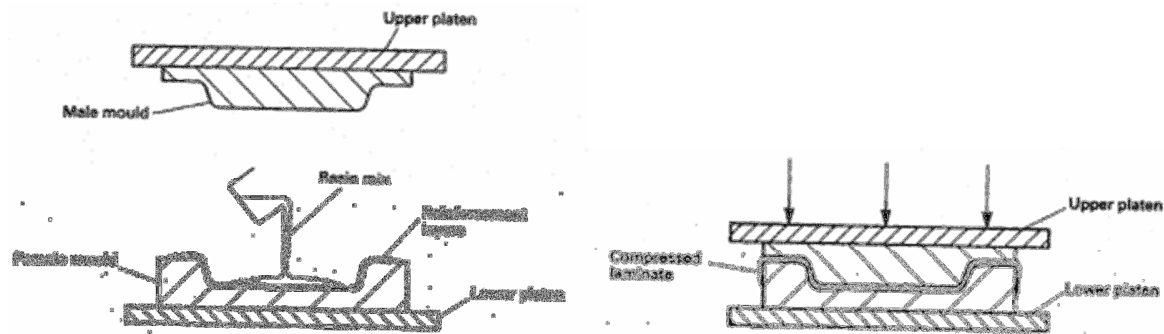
Cold/Hot press moulding (Kolstein, 2008, page 4.14)
